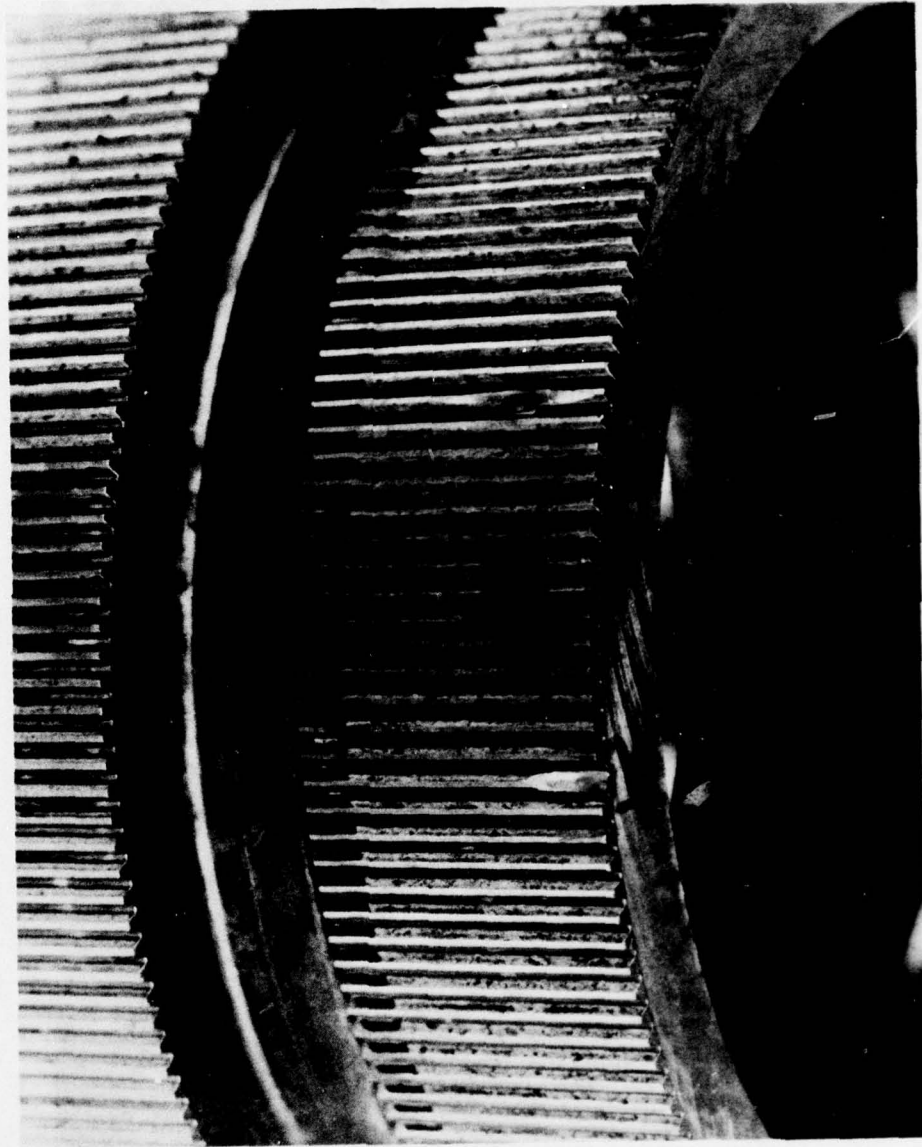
Ring Gear After Run No. 6 (Lower Gear)
